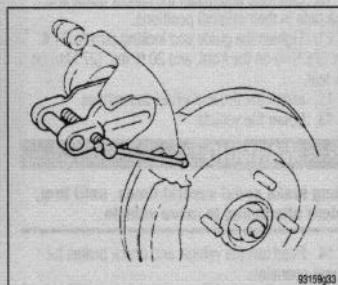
Retracting brake caliper piston and aligning pad to piston—Mirage
